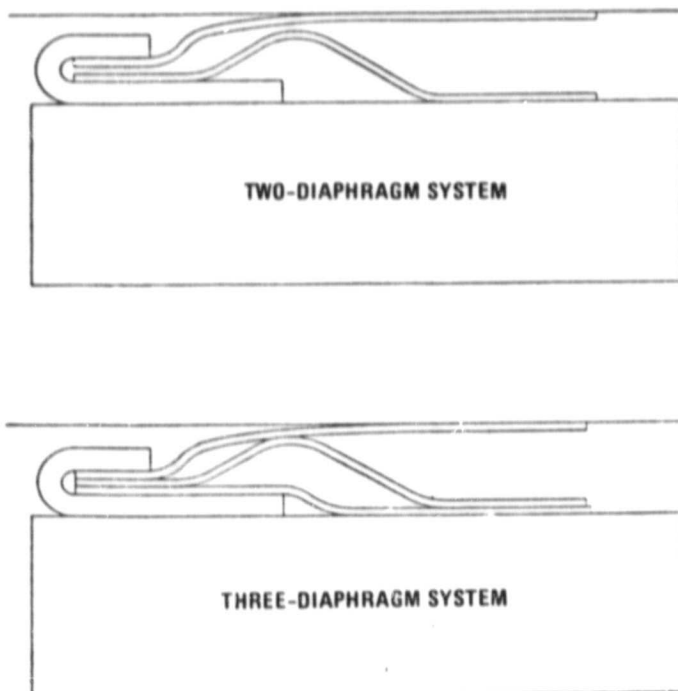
Revised Regenerator Seal Diaphragm Assembly.
